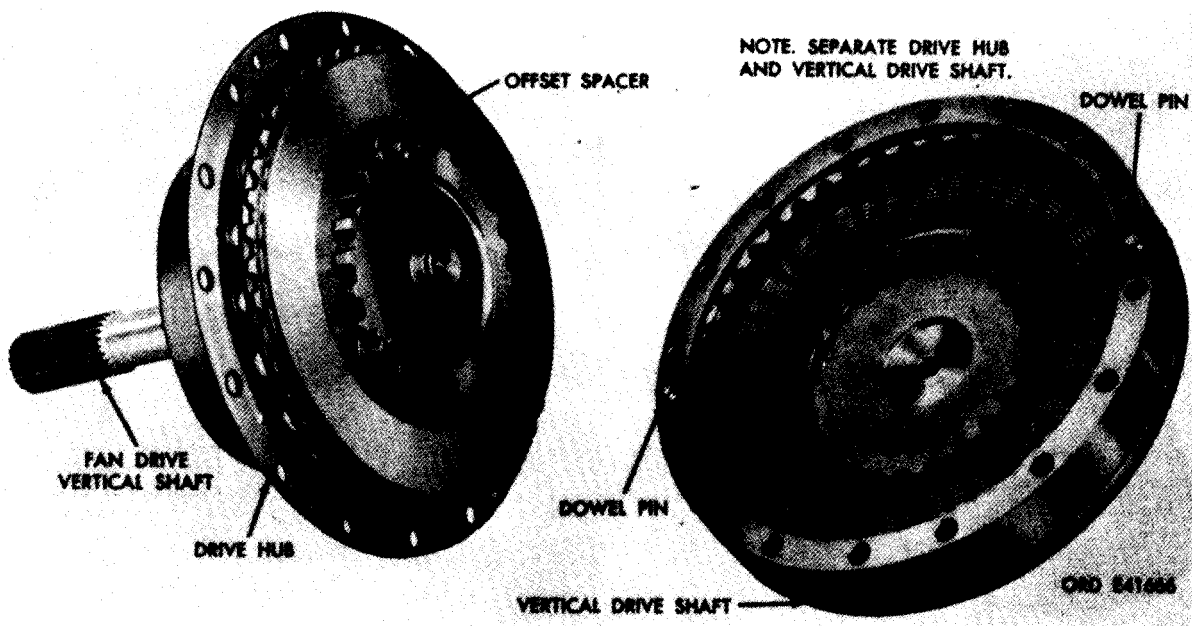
Separating or positioning fan drive hub and vertical drive shaft (piston actuated clutch).
